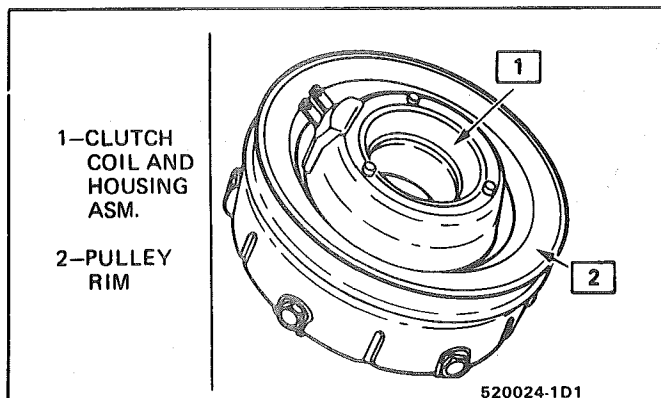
Assembling Clutch Coil, Pulley Rim, Rotor & Bearing
